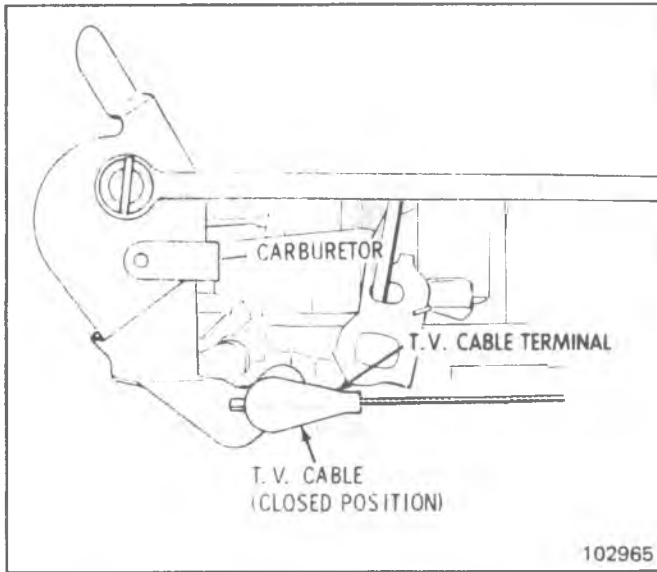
A-10--T.V. Cable at Carburetor Lever (Typical)
